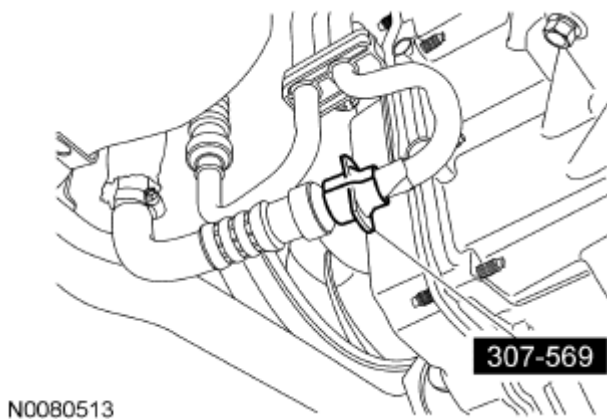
Identifying Transmission Cooler Line Disconnect Tool
